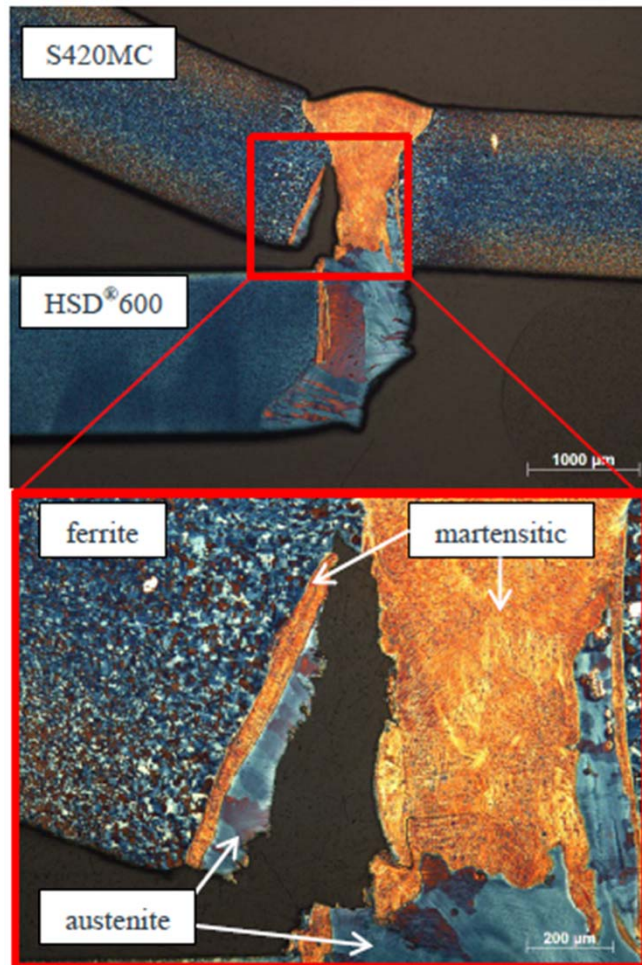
appearance of a through welded, dissimilar seam (HSD[®]600, S420MC); P_L : 4 kW, v_f : 3 m/min, z_f : 0 mm
